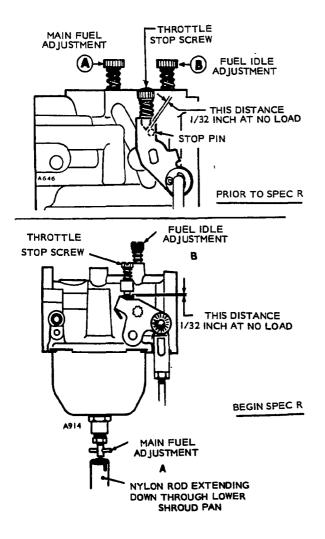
ADJUSTING GASOLINE CARBURETOR
